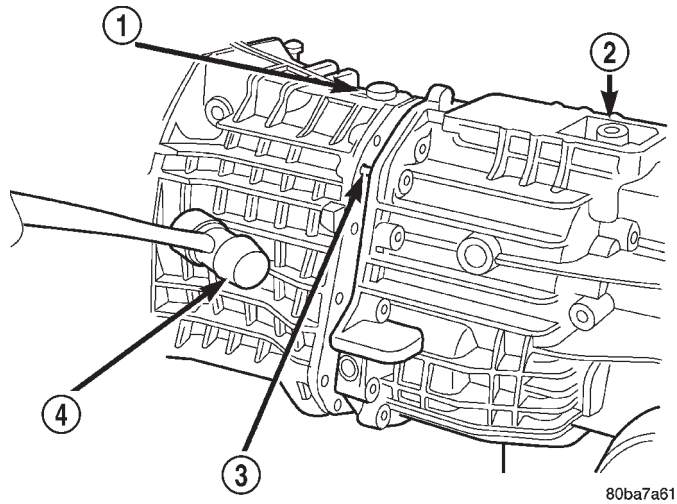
HOUSING AND BEARING RETAINER BOL
